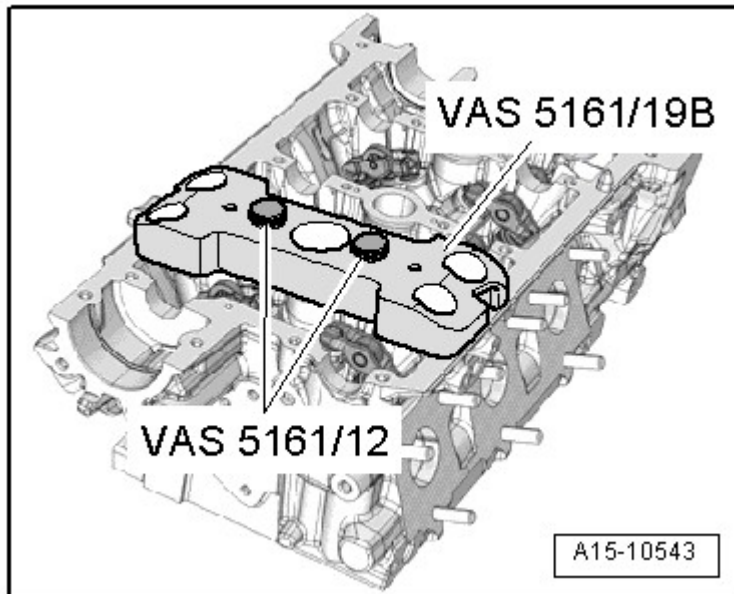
Identifying Guide Plate VAS 5161/19B Positioned On Cylinder Head
